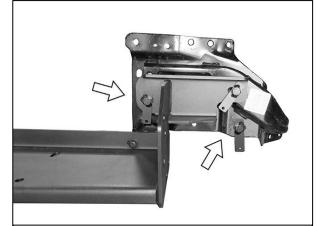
Insert (2) Bolt Plates through top holes in Bracket Assembly. Slide Tube Spacer onto inner Bolt Plate. Attach steel bumper bracket to slot in Winch Tray. Thread Plastic Retainers onto Bolt Plates to hold steel bumper bracket in place.
